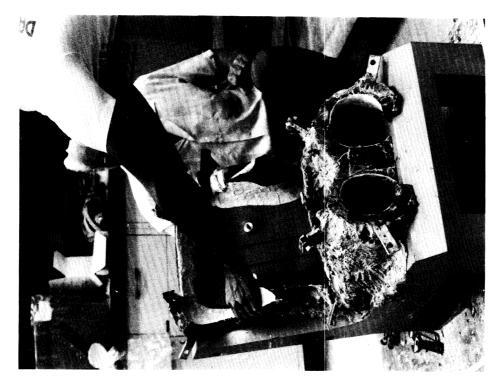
Assembling mold parts on hardseat to lay-up back side of shell using seat as the mold.
